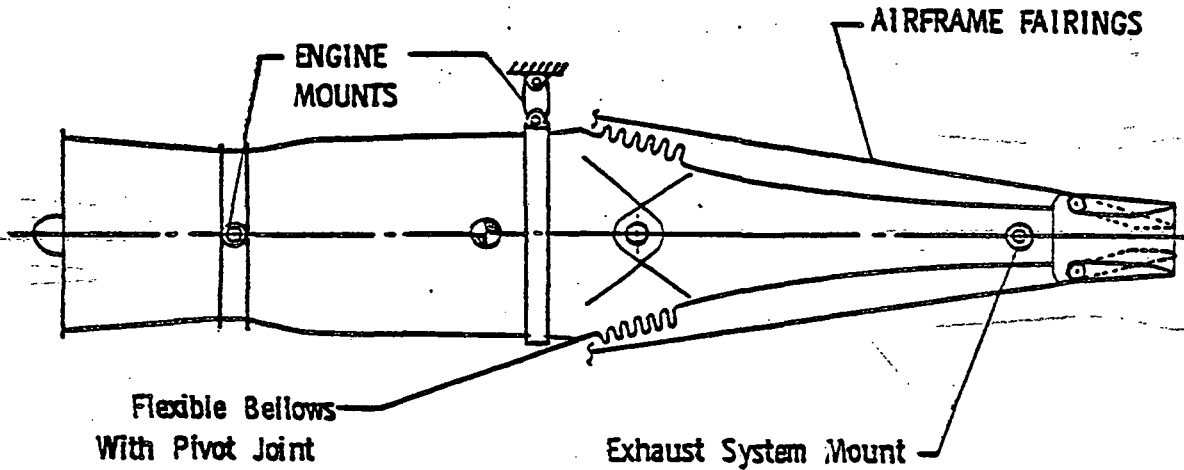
A.2-4. Potential Mounting Schematic for Configurations No. 1 and No. 2
